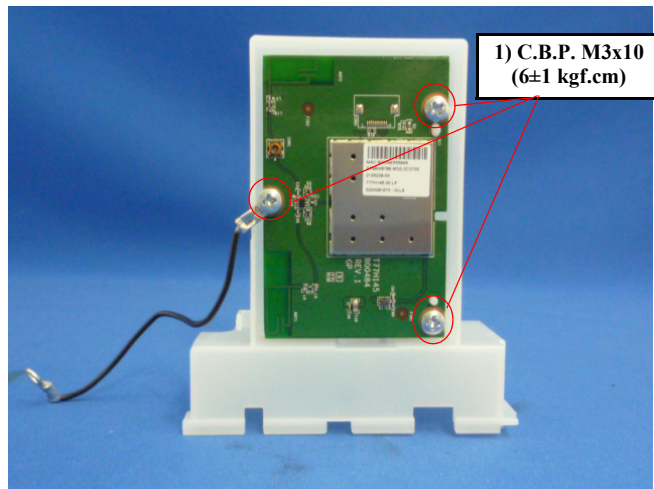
Screws that secure the Wireless LAN Board and Wireless LAN Board Holder.
